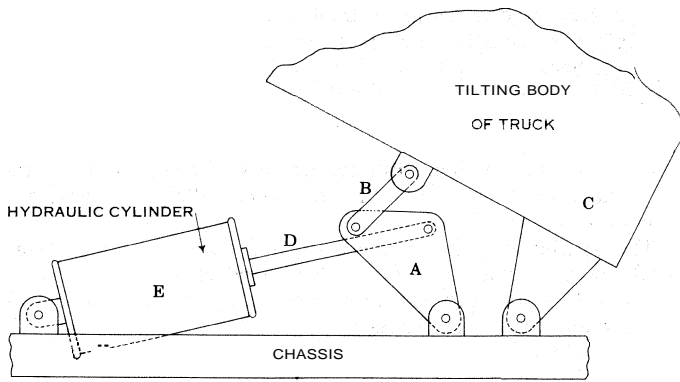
HYDRAULIC TIPPING MECHANISM FOR MOTOR TRUCK BODY
